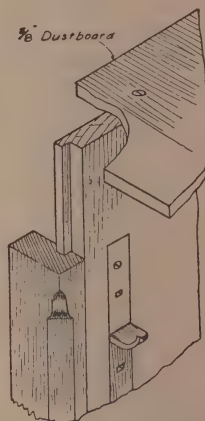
Top Corner with Cornice Removed to show Tongue
